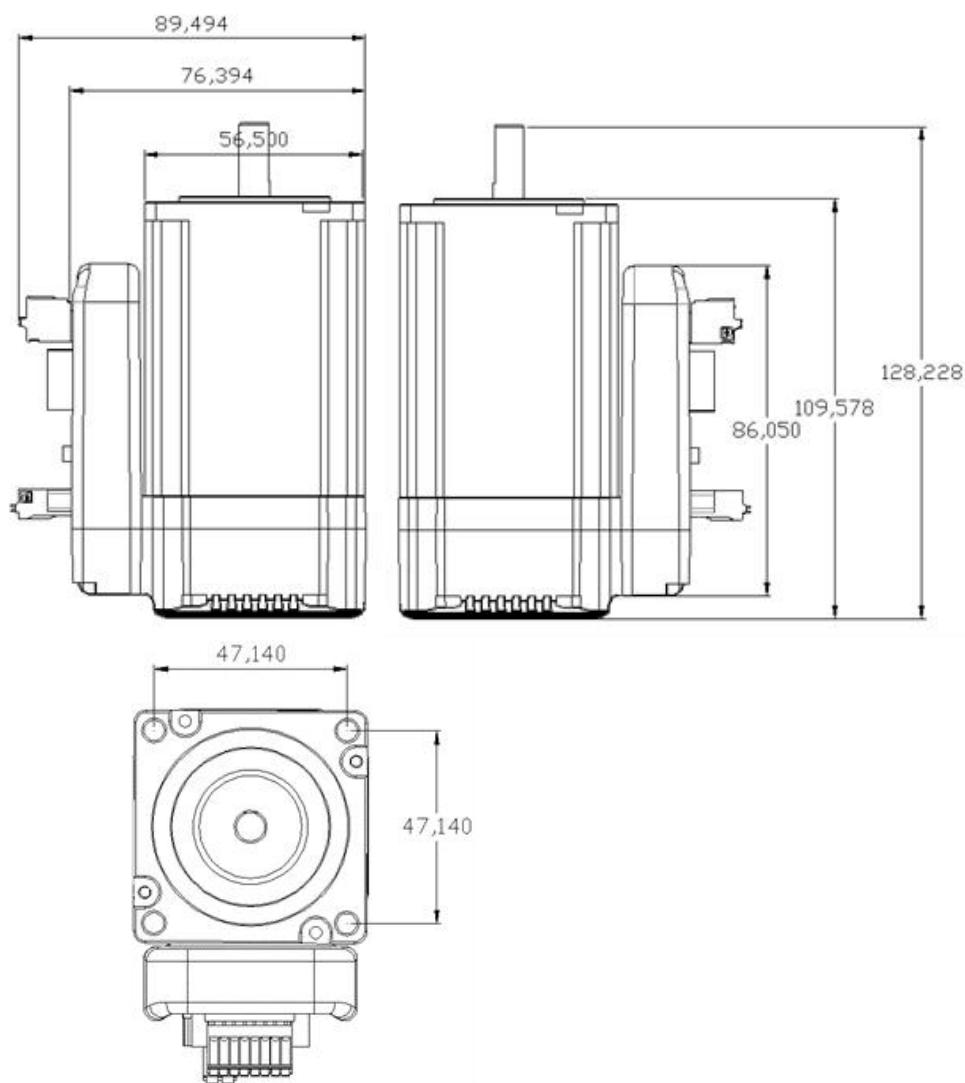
Machine dimension of JMC IHSS57-R/RC Drive (unit: mm)
